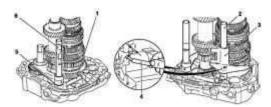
Installation of components switching mechanism 1 st / 2 nd Shows: 1 - clamping bolts 2 - stock transfer switch, 3 - plug switch 1 st / 2 nd transmission, 4 - a special tool, 5 - fork shifting gears reverse 6 - rod change gear
